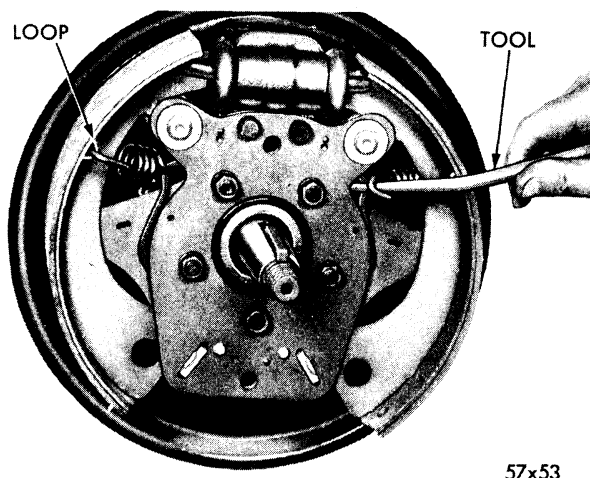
Removing Rear Brake Shoe Return Spring With Tool C-3462
